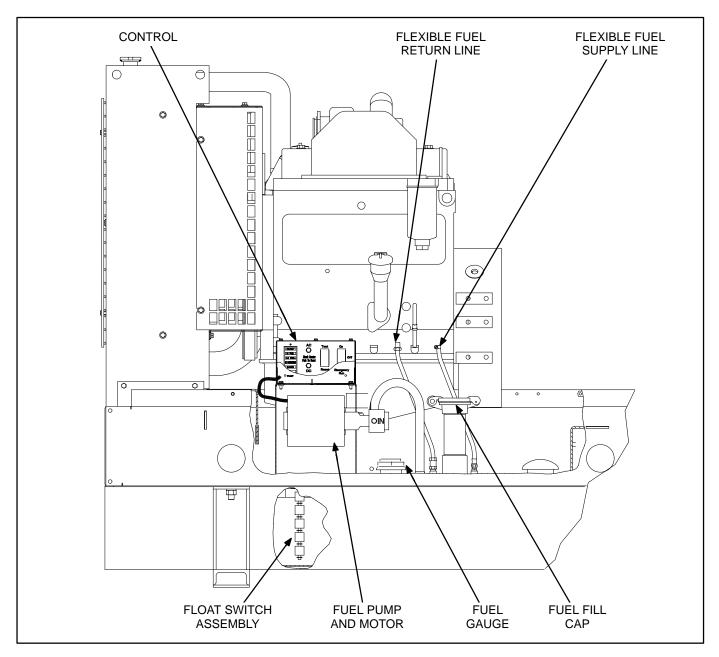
TYPICAL SUB-BASE INSTALLATION
